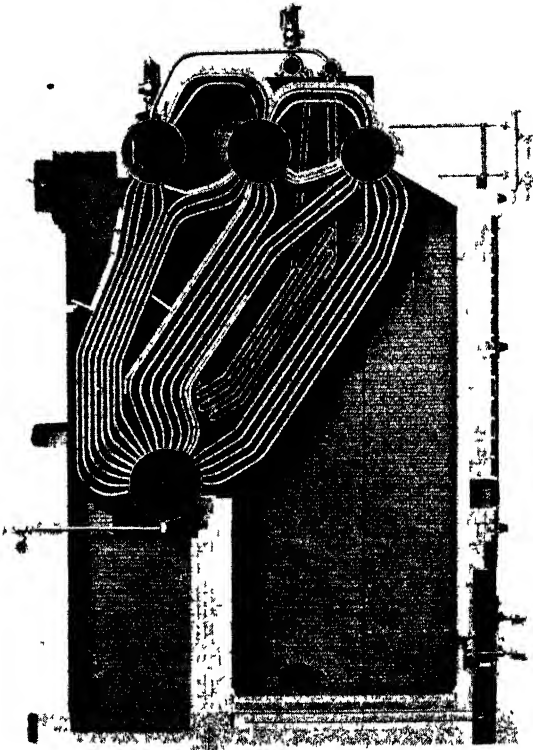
Stirling type boiler (Babcock & Wilcox Co.)
